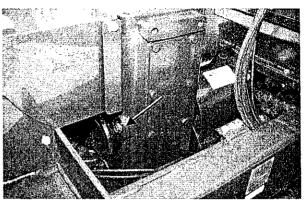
Two-Speed Gearbox Oil Level Sight Plug.
